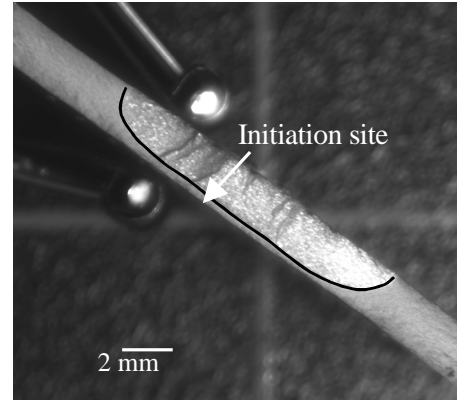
Visible light optical photograph of the fatigue fracture in a spot weld. The black line outlines the region of fatigue failure.
